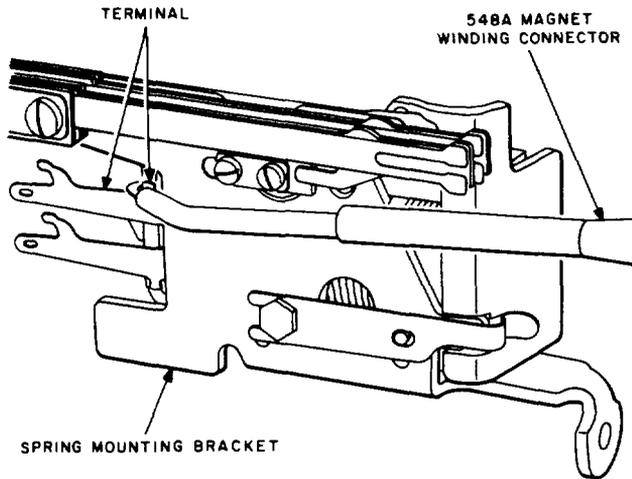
Connecting to Winding Terminal of the Hold Magnet of the 300-, 301-, 302-, 303-, 304-, 305-, 306-, 307-, 308-, 314-, 315-, and 318-Type Switches
